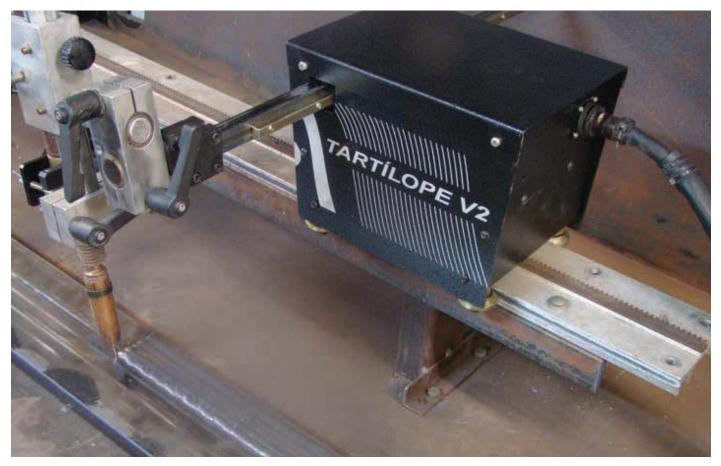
The equipment setup for demonstrating the validity of the synchronized polarity gas metal arc welding technique.
